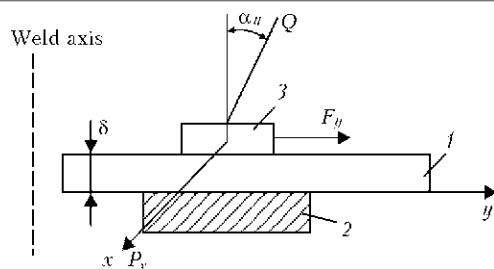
Schematic diagram of edge fixing with clamp: 1 – welded plate; 2 – base; 3 – clamp
